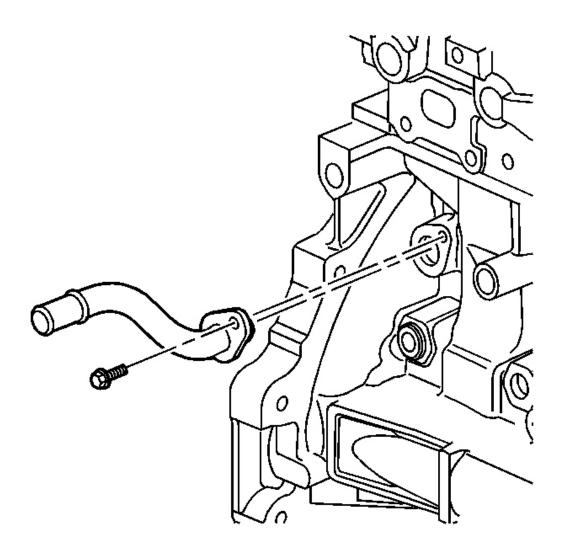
View Of Heater Inlet Pipe Courtesy of GENERAL MOTORS CORP.
